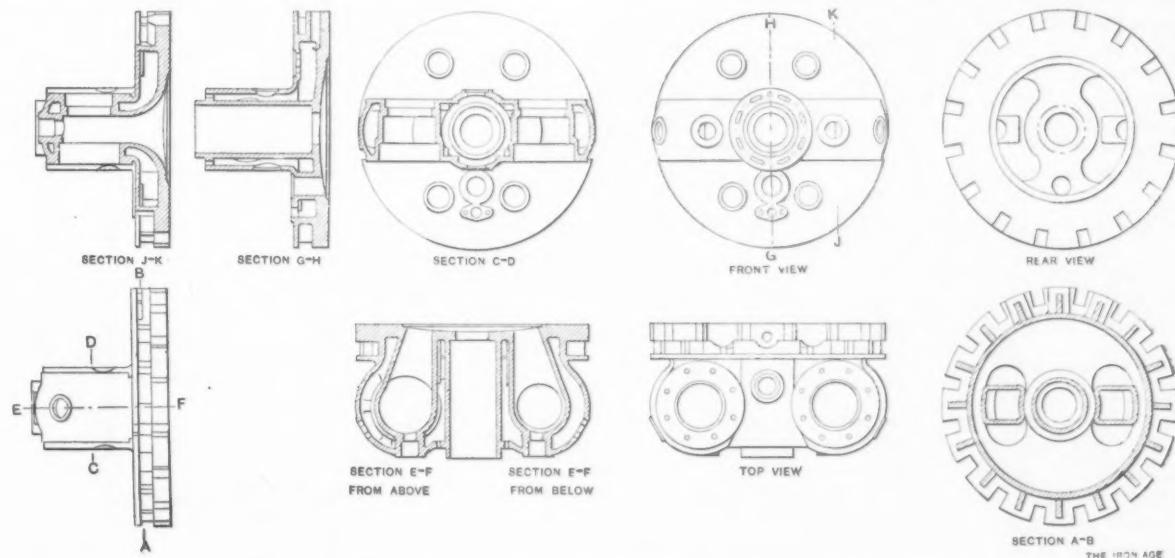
Detail of the Middle Part of the Three-Piece Cylinder Head in the Gas Engine Shown in Fig. 1.
